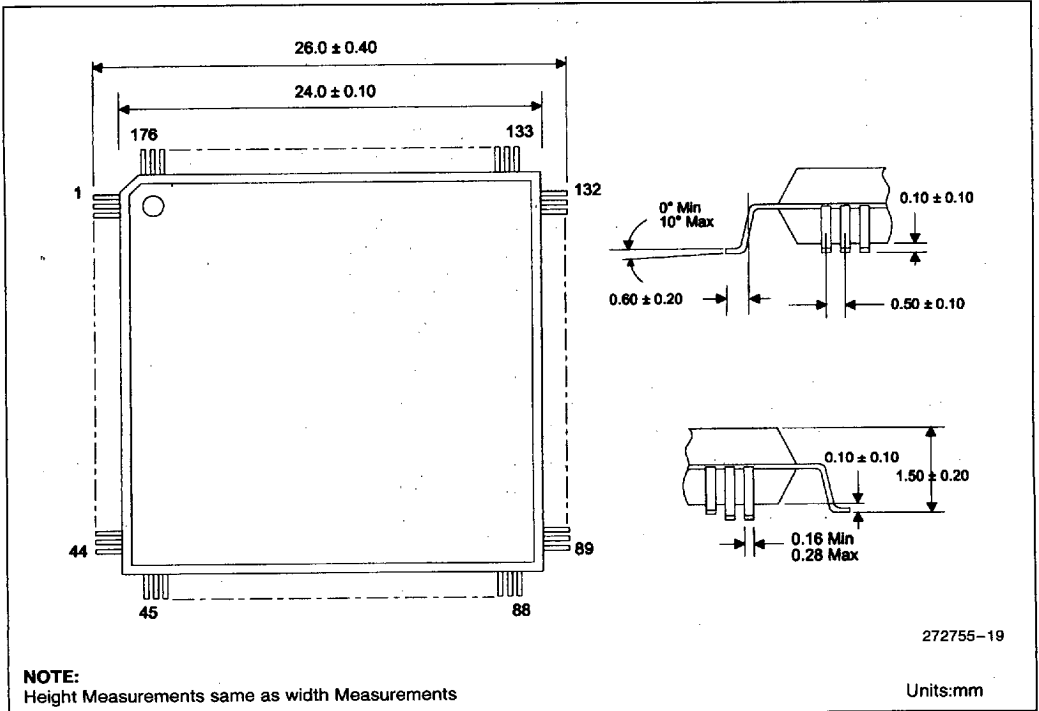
Package Mechanical Specifications for the 176 Lead TQFP Package
